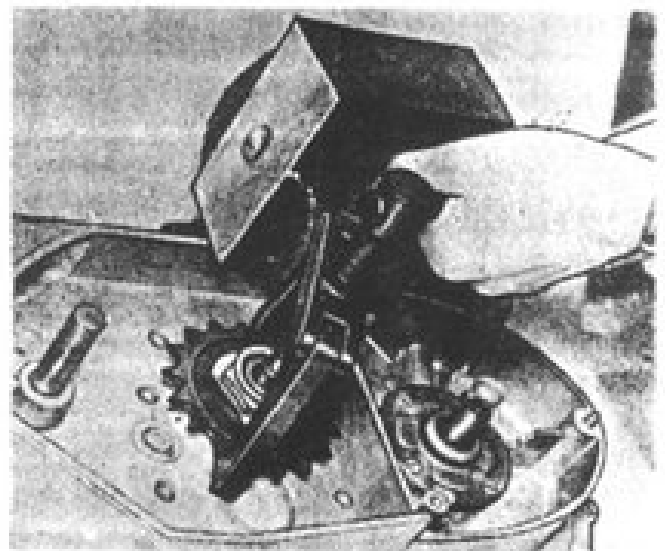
Removal of gearbox cover, ИЖ-П-3 motorcycle.
